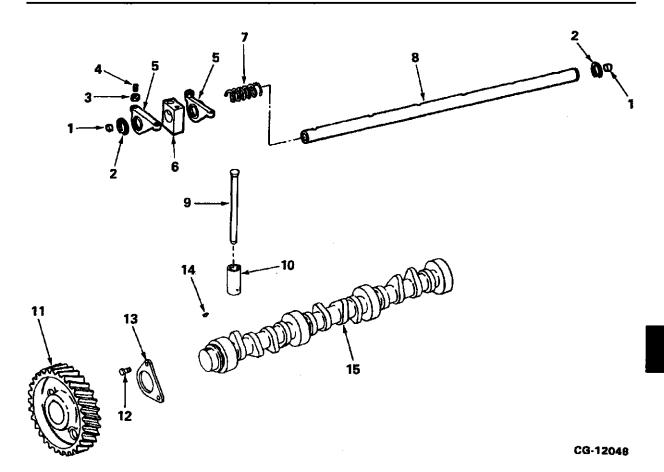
Rocker Arm Assembly, Camshaft, Tappets and Push Rods (Exploded View)
